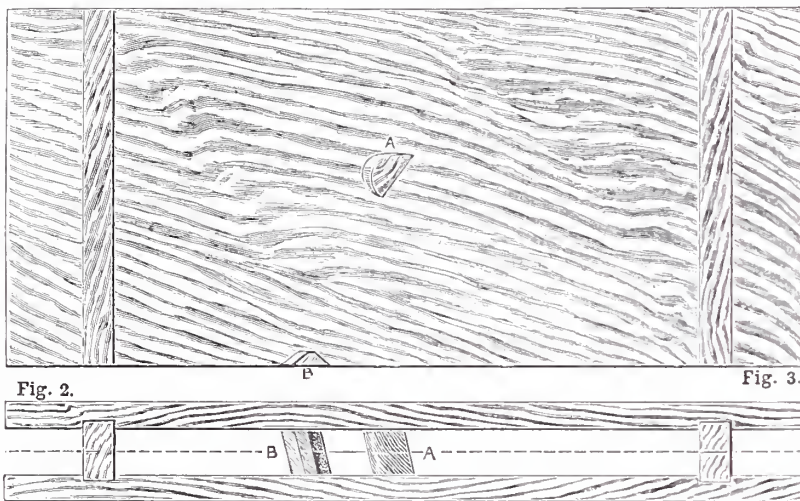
Core Box for Rebate Plane: Plan. Fig. 3.—Ditto: Section.
